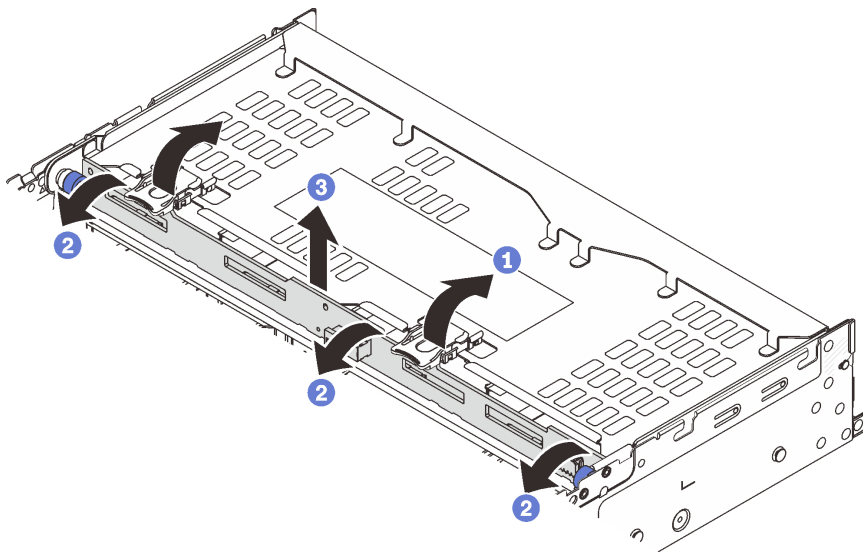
Removing the 4 x 3.5-inch rear drive backplane
